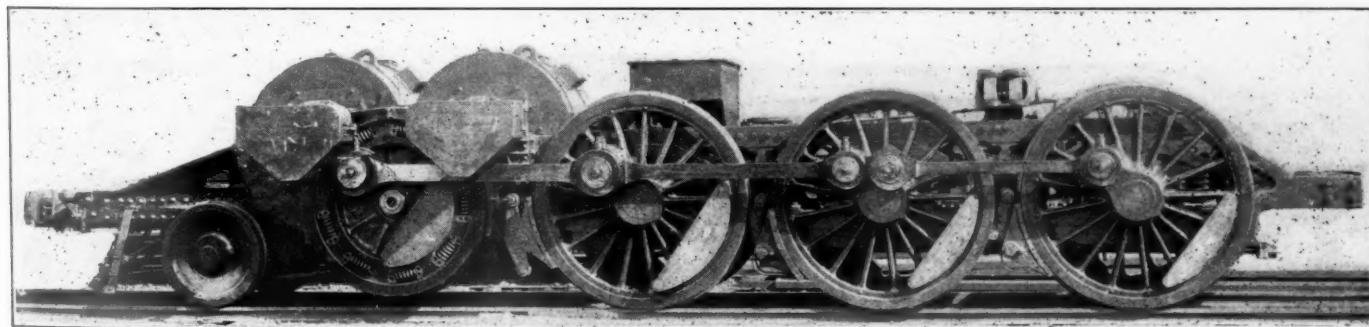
One of the Driving Trucks for the Pennsylvania Electric Locomotive Showing Motor and Spring Gear Jack Shaft
